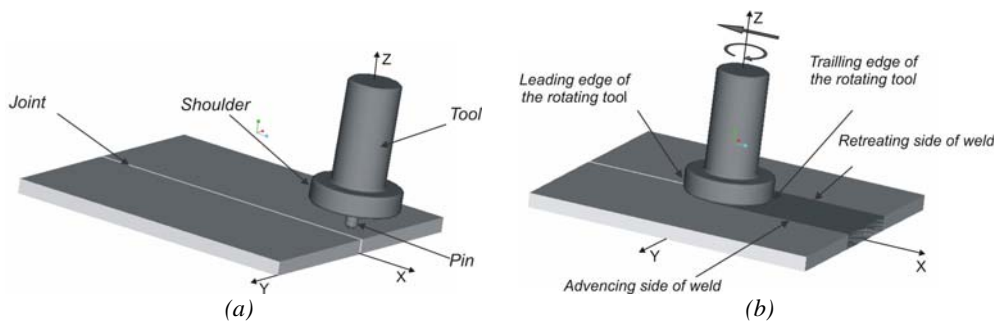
Tool and work piece; (a) Presentation of tools and sheet metal prior to friction stir welding process, (b) Presentation of tools and sheet metal during the friction stir welding process [2]
